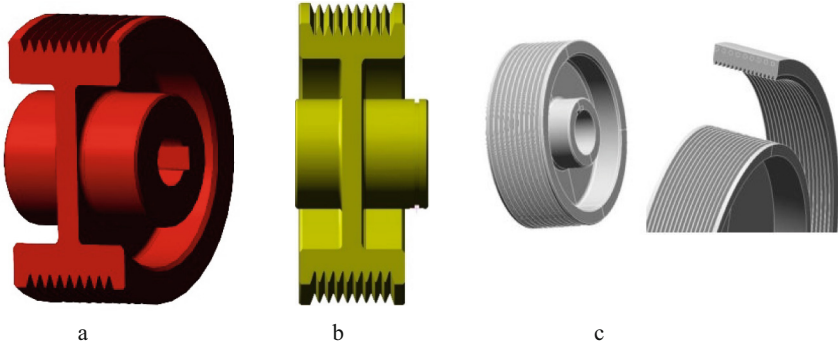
Three-dimensional models of pulleys: a – driven; b – driving; c – assembled
